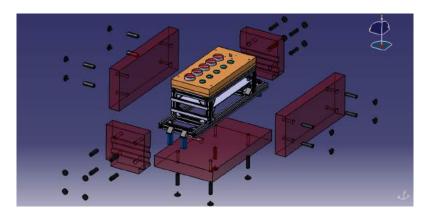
Exploded view of the sensor box. The red panels are those of thermal insulation.
